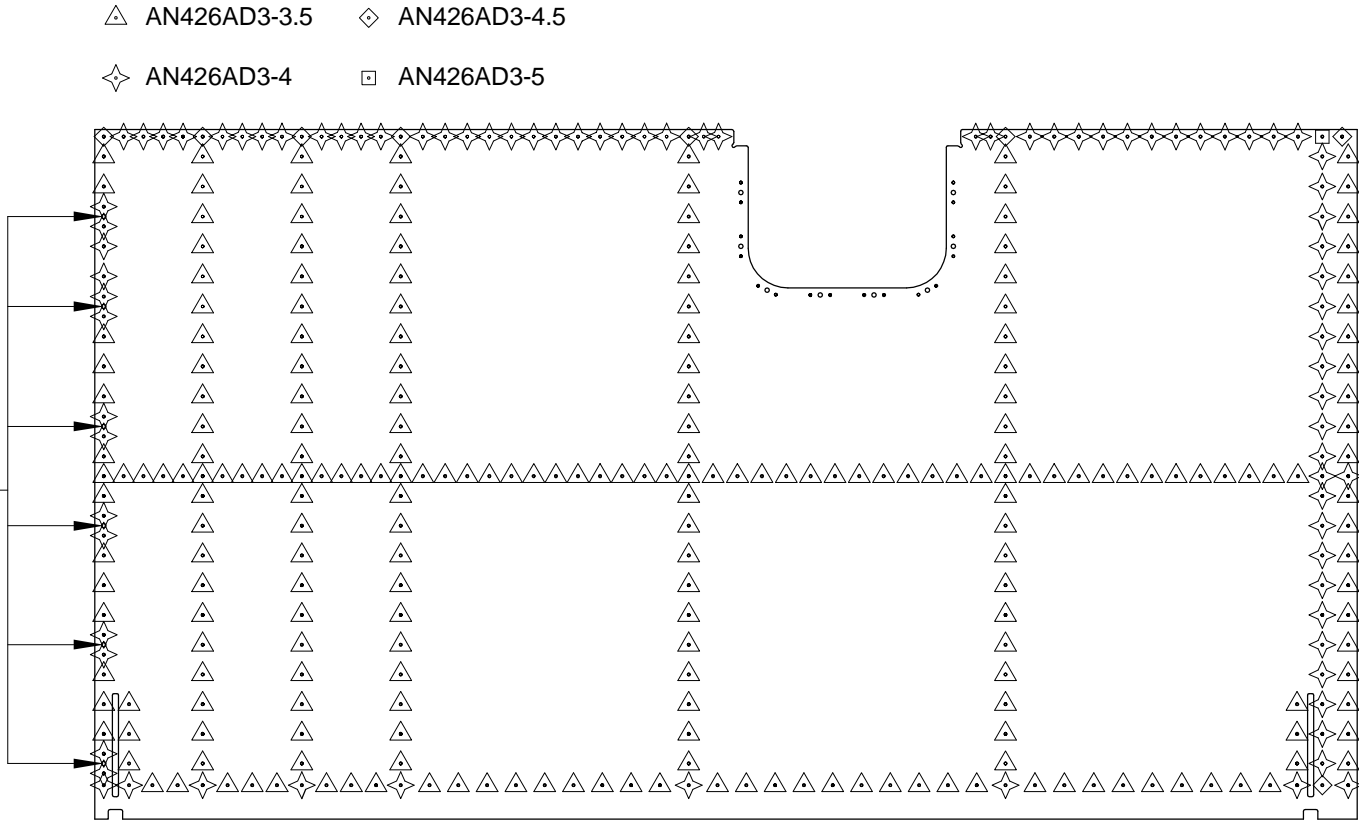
BOTTOM INBOARD SKIN RIVET CALLOUTS
